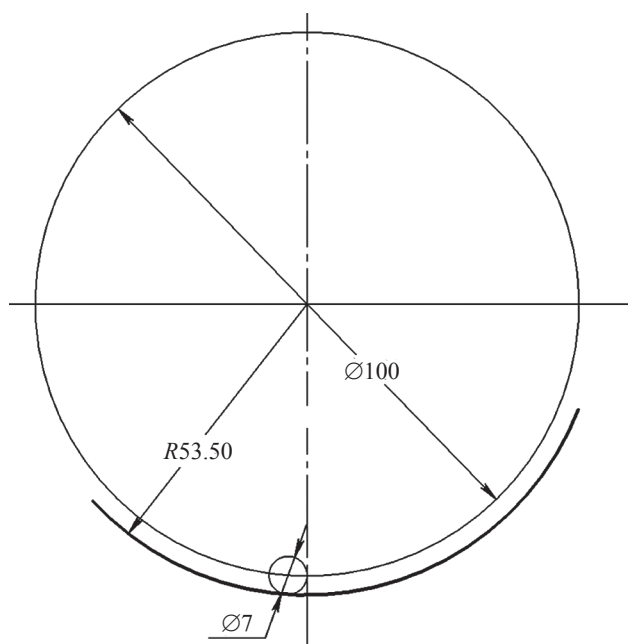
Cross-section of the milling cutter and the workpiece (diameter 100 mm refers to the cutting radius center point)
